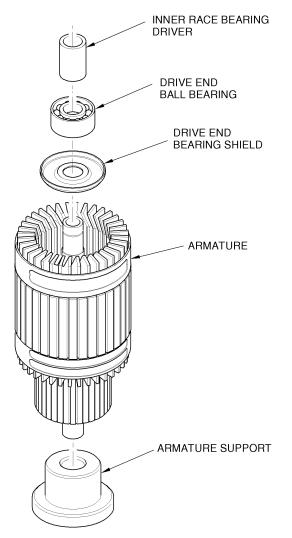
Installing Drive End Bearing Shield and Ball Bearing on the Armature Shaft
